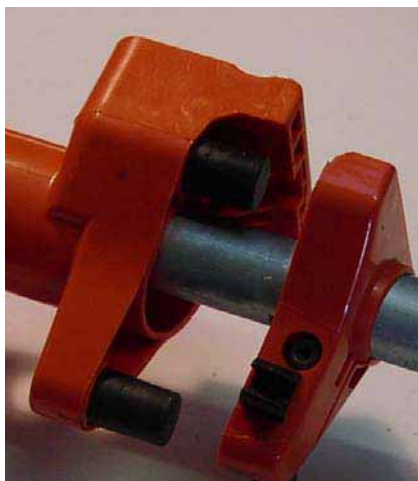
Anti-vibration mount detail showing elastomeric bobbins
